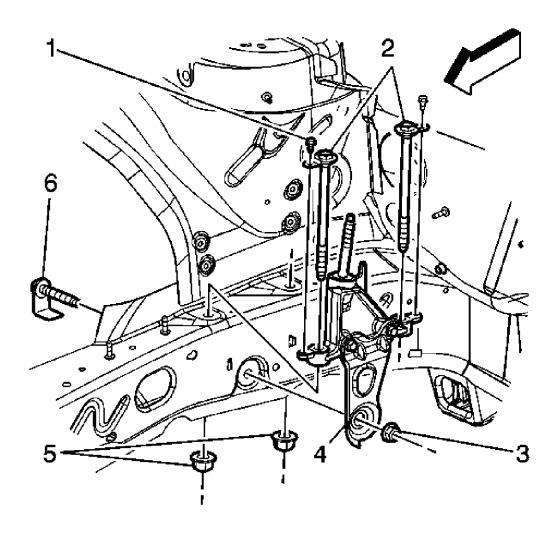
View Of Engine Mount Strut Bracket & Bolts Courtesy of GENERAL MOTORS CORP.
